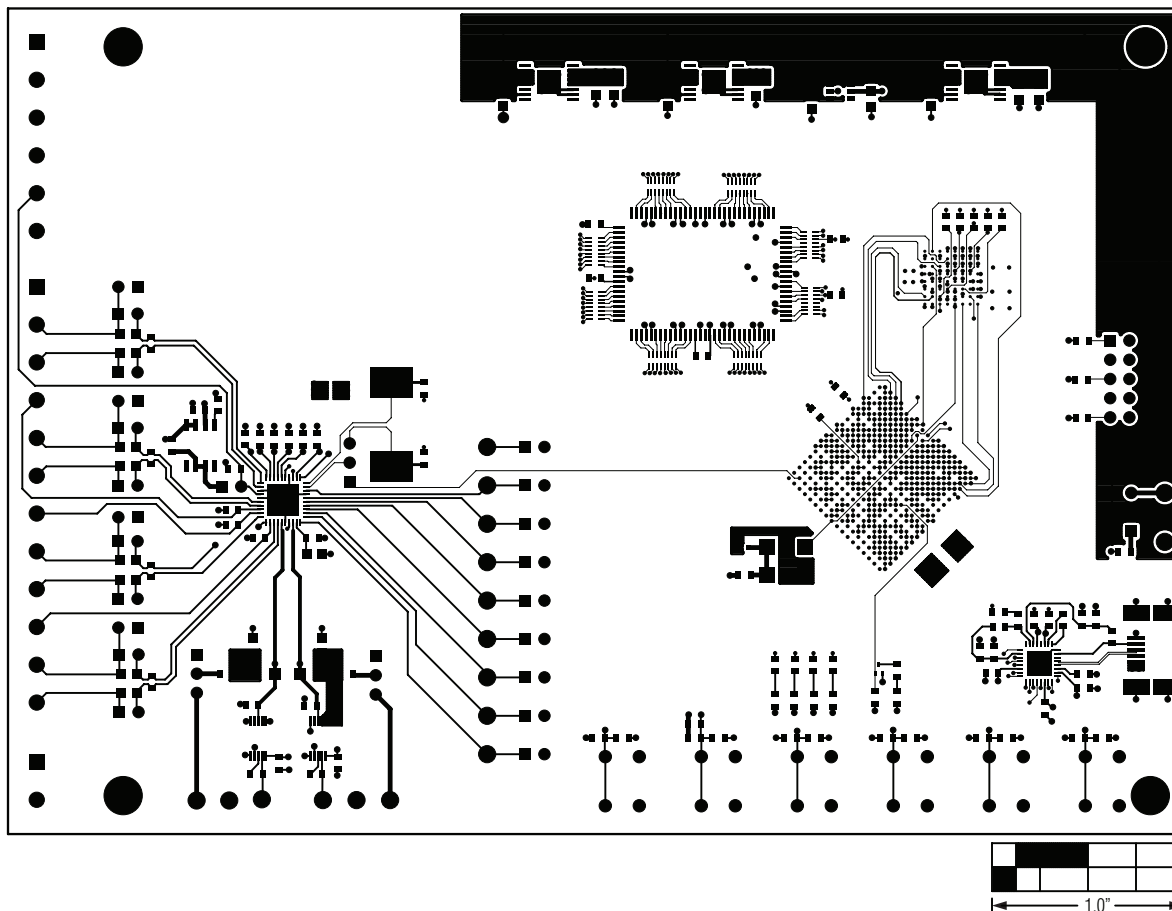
MAX11043/11043 EV Kit PCB Layout—Component Side
